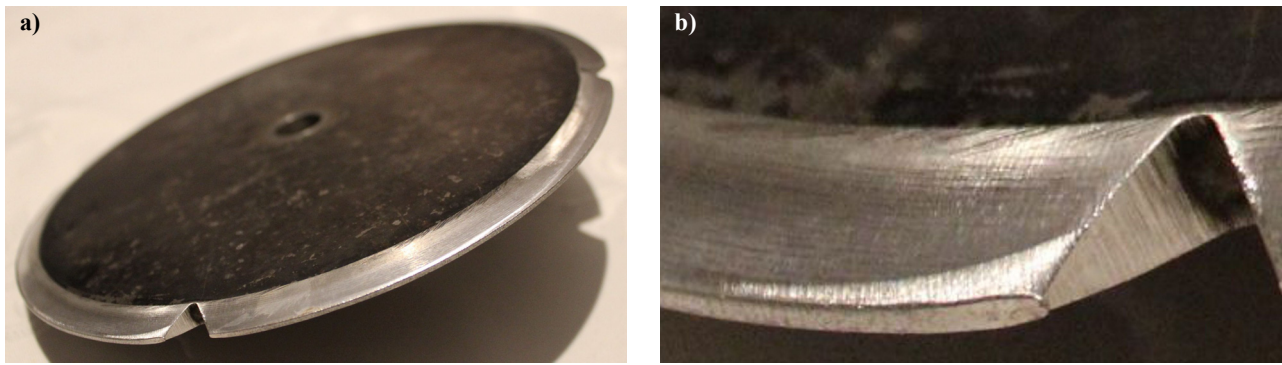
Disc-cutter for cutting rubber (a) and a fragment of the cutting blade (b)
